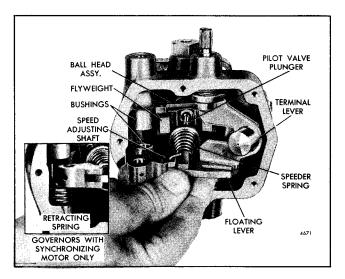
Installing Speed Adjusting Lever, Floating Lever, Speeder Spring and Pilot Valve Plunger Assembly
